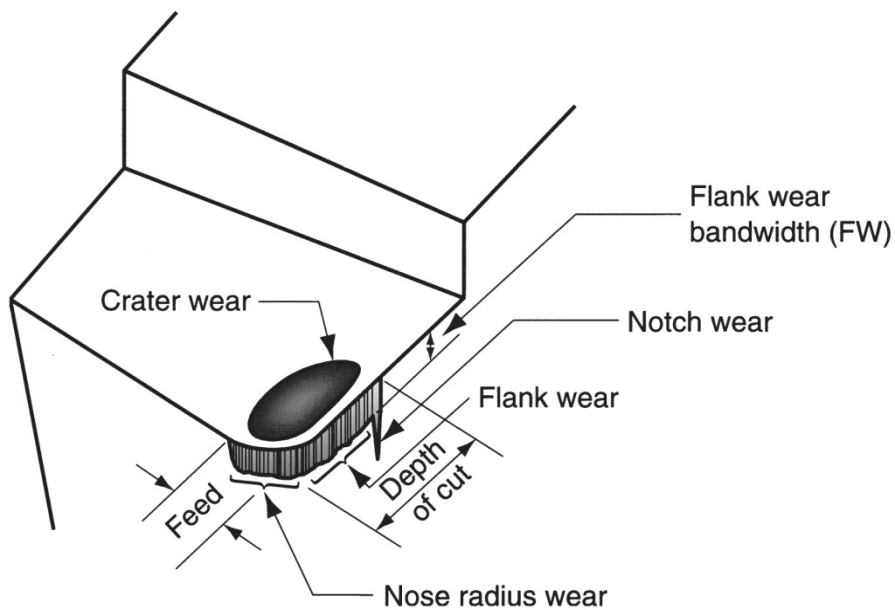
Worn cutting tool, showing the principal locations and types of wear [5].
